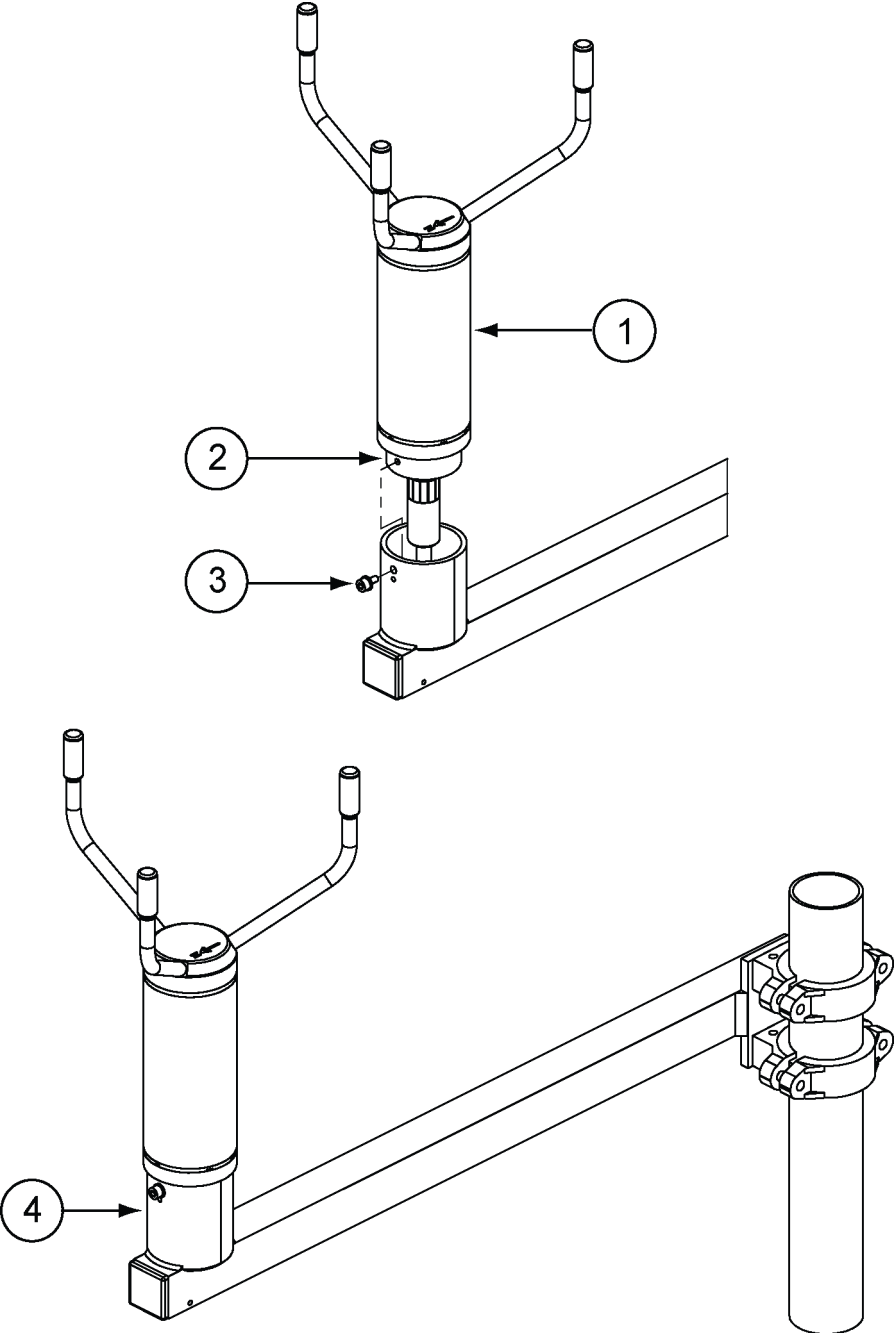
Retrofit Installation to Cross Arm with Array Facing Up
